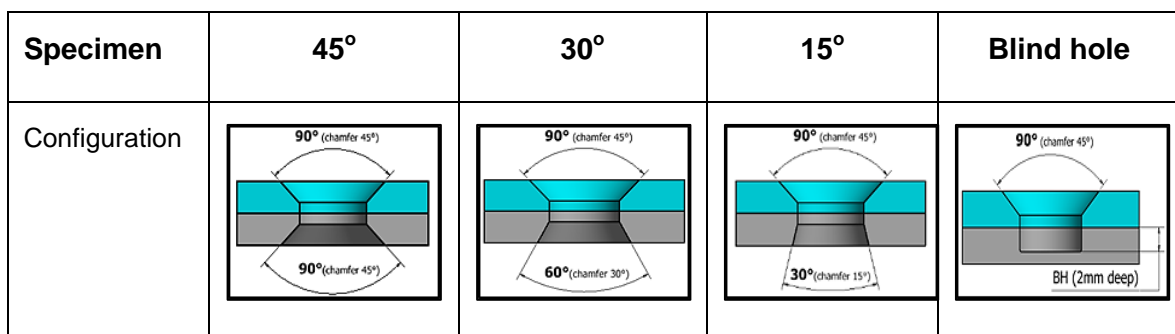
Geometry of the plate with varying chamfer angles and the blind hole
